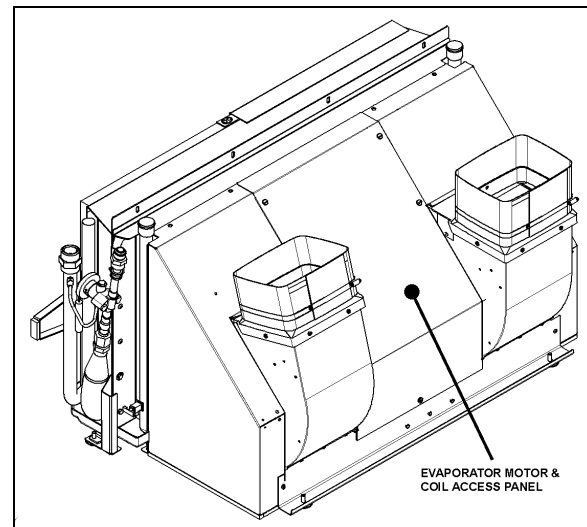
EVAPORATOR COIL ACCESS PANEL (TYPICAL)
